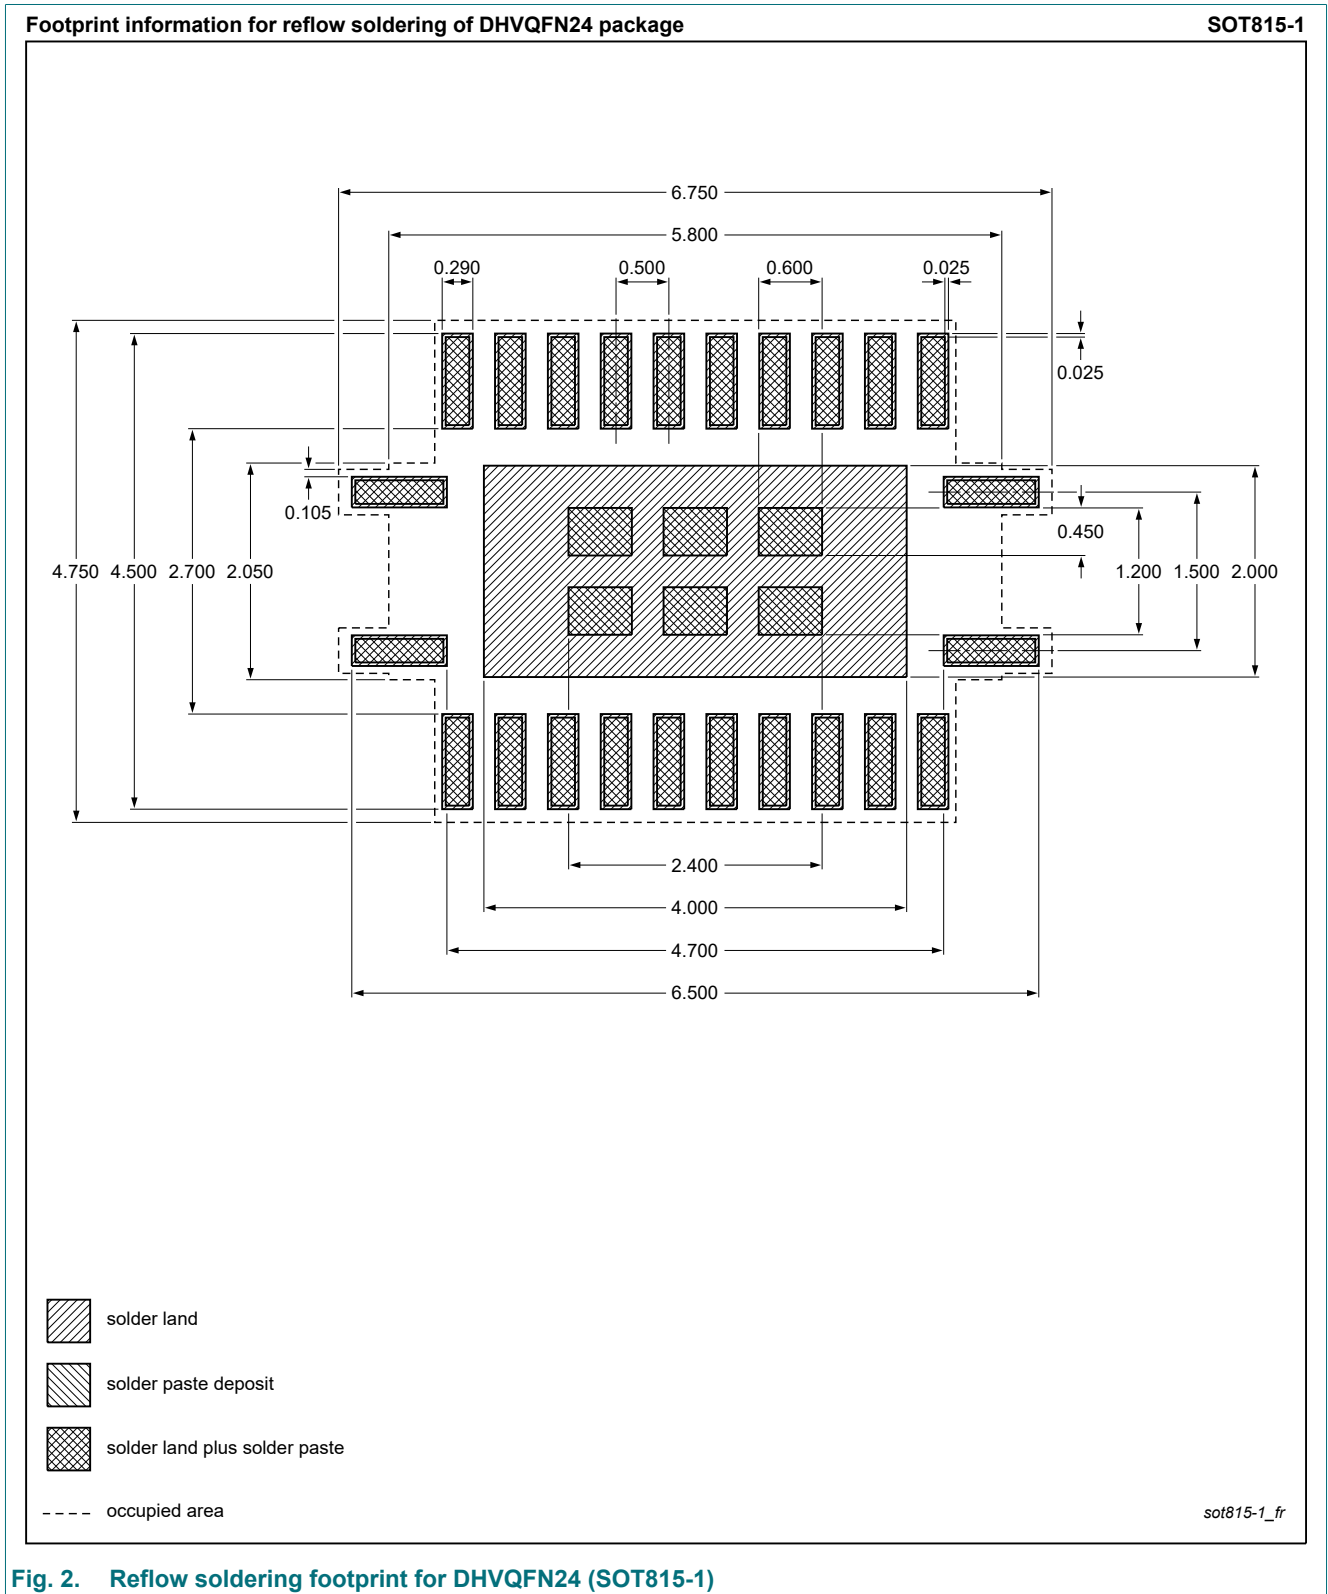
Reflow soldering footprint for DHVQFN24 (SOT815-1)
